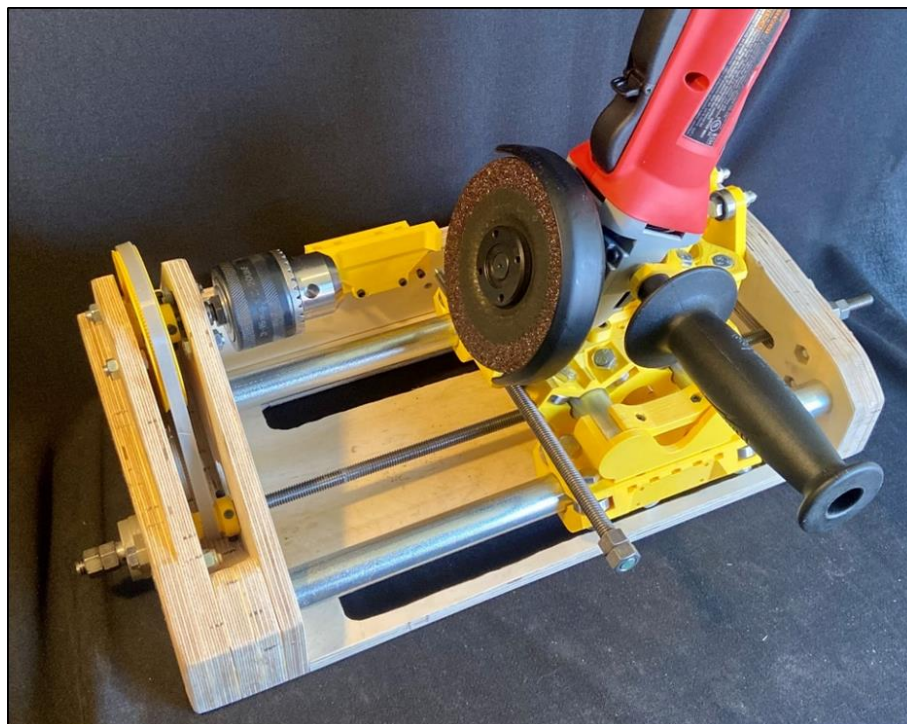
Threaded rod tension slide installed onto the chuck end of the plywood frame.
